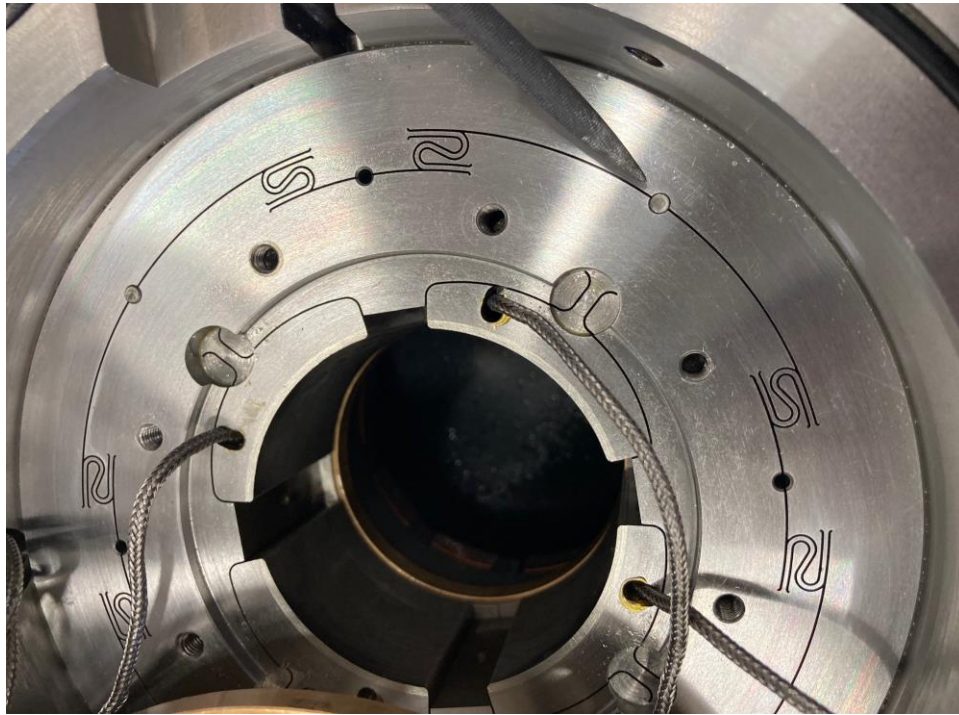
Photo of Squeeze Film Damper Bearing with Locking Pins
